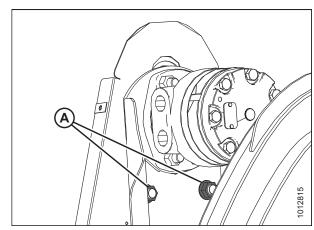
Single-Reel Drive Shown – Double Reel Similar
